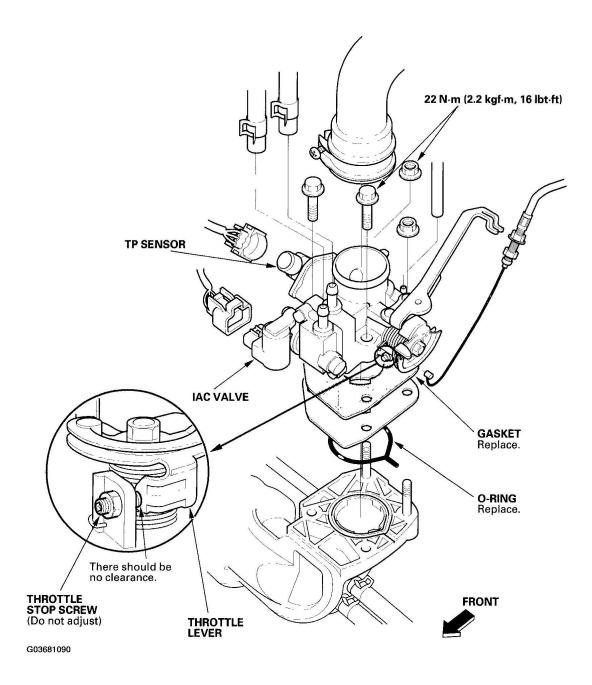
Identifying Throttle Body Removal/Installation Courtesy of AMERICAN HONDA MOTOR CO., INC.
